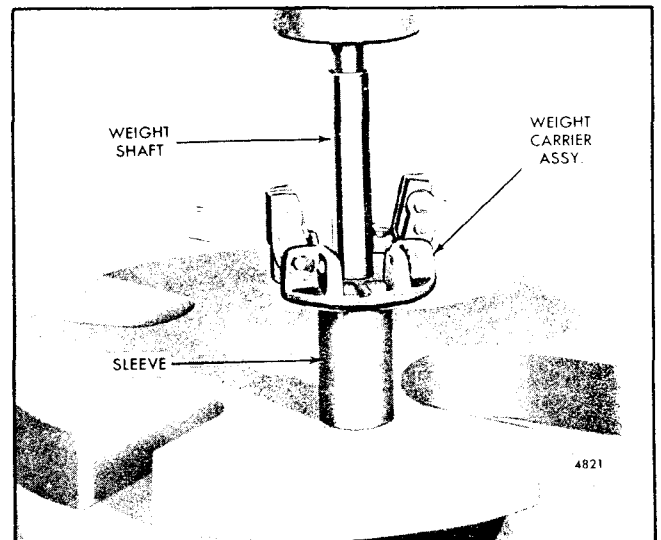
Removing Governor Weight Shaft from Weight Carrier Assembly
